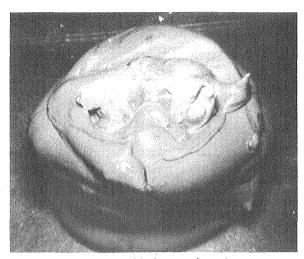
Invest assembled parts heavily to prevent distortion during soldering—do not bury piece (plaster core index and contained assembled parts) in investment.
